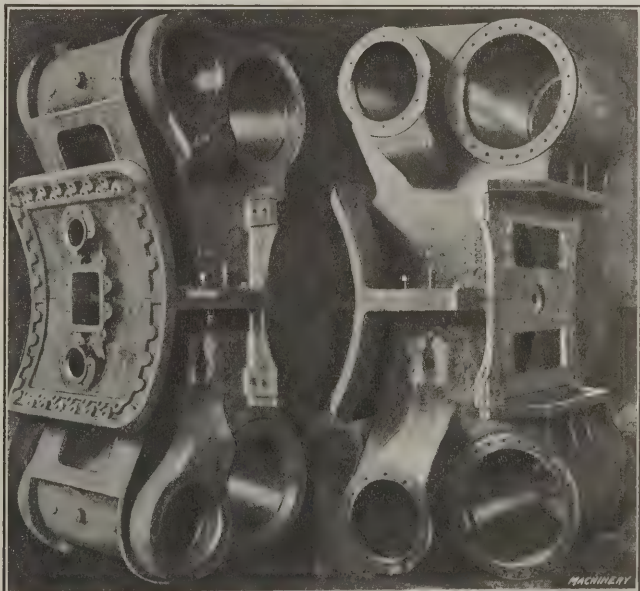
Cylinders aligned for Reaming Flange Bolt Holes
